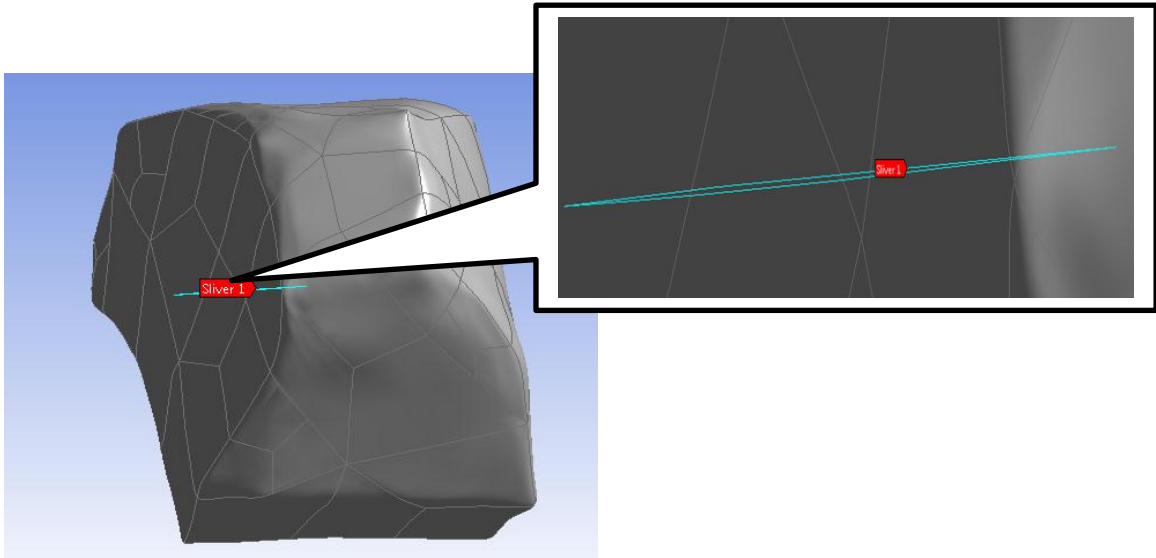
CAD geometry of Airfilter, before the sliver was eliminated
